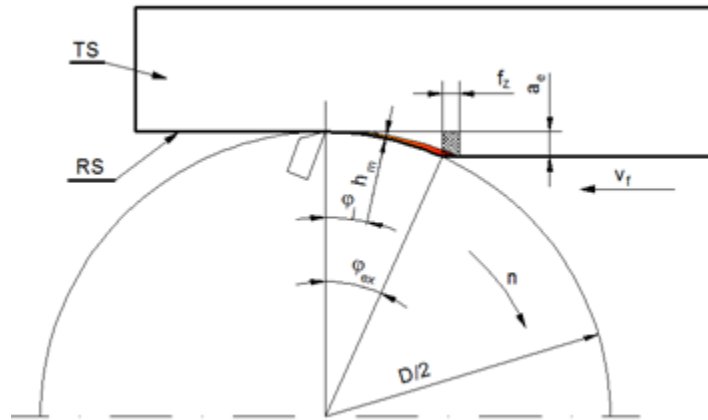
A scheme of plain milling with conventional cutting, where: D – tool diameter, f_z – feed per tooth, a_e – working engagement, v_f – feed speed, n – rotational speed, h_m – average uncut chip thickness, φ – angular cutting edge position, RS – radial surface, TS – tangential surface
